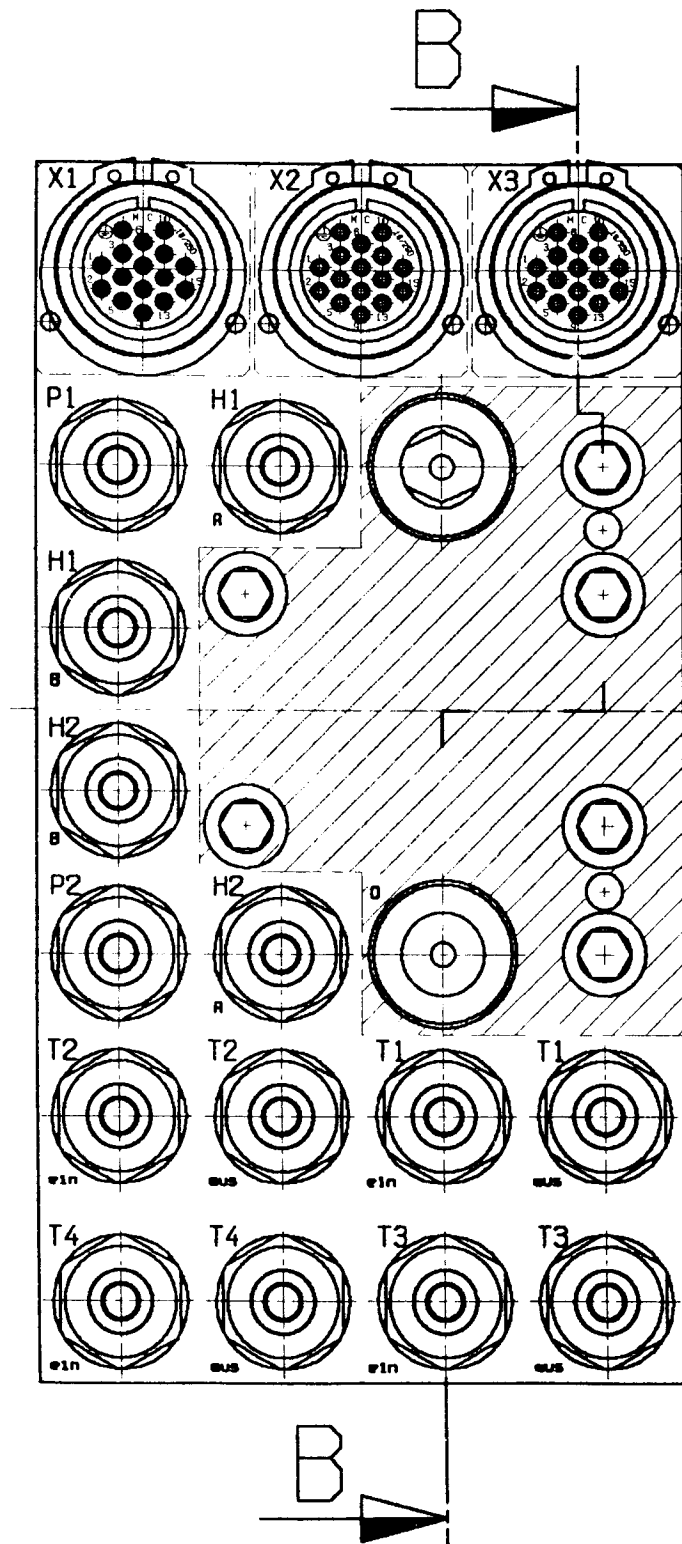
View of a fixed machine side; view of coupling side (opposite the connecting side). Position C according to Fig. 1 is shown.
